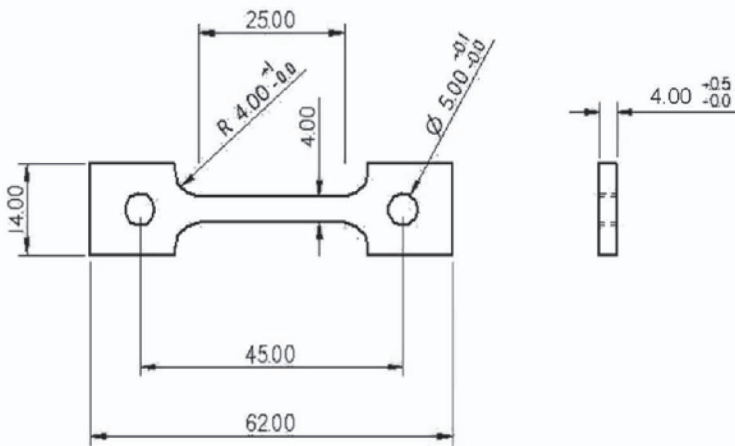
The dimensions of the samples (in millimetres) used for tensile testing
